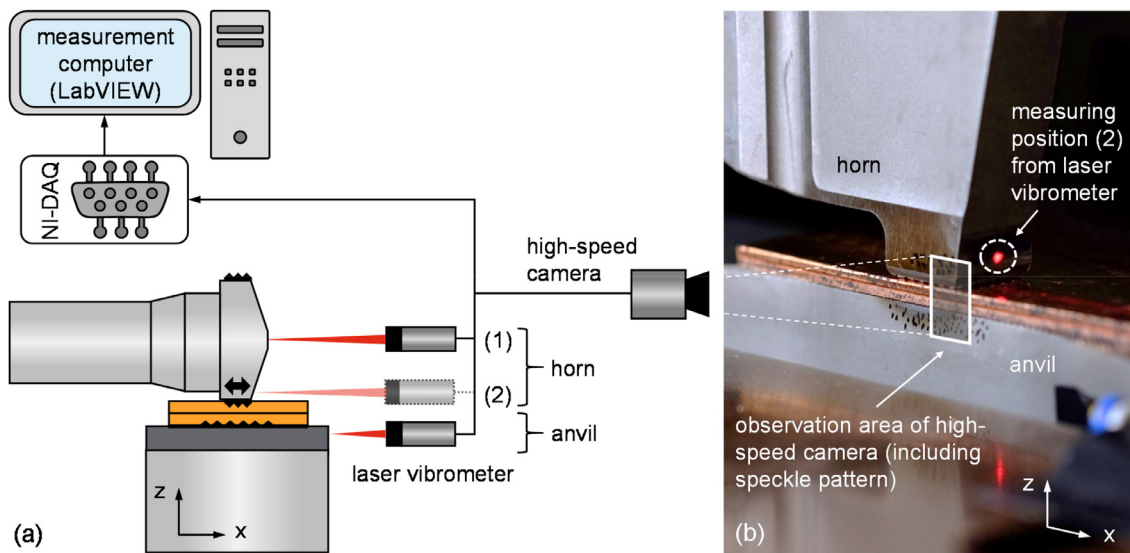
(a) Schematic illustration of measurement setup and (b) zoomed in view showing a typical measuring configuration during tab welding.
